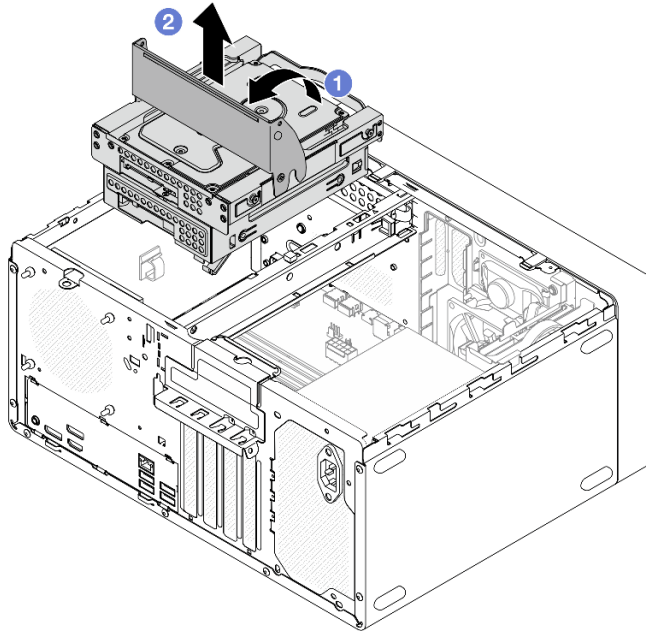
Removing the bay 2+bay 3 drive cage assembly
